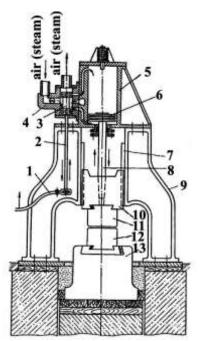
Forging hammer: 1 – handle; 2 – traction; 3 – valve; 4 – hole (pipe); 5 – cylinder; 6 – piston; 7 – sliding surface; 8 – rod; 9 – body; 10 – slider; 11 – block head; 12 – smithy; 13 – anvil block
